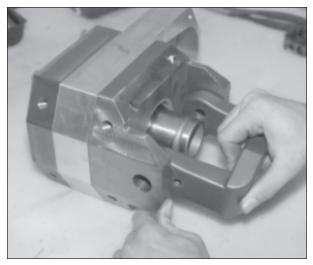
Pull left side of latch away from bottom plate extension.
